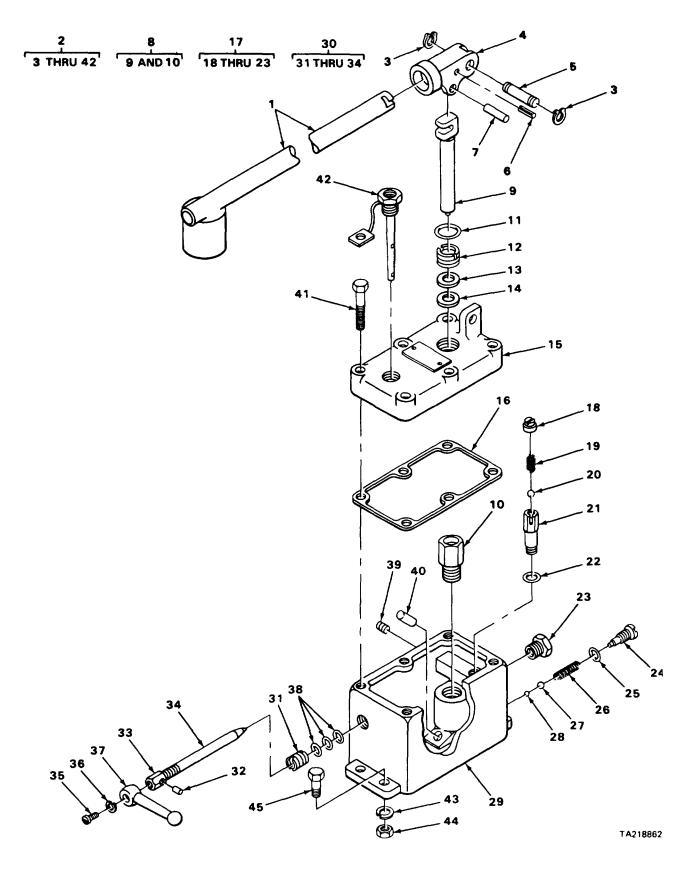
HYDRAULIC PUMP ASSEMBLY.
